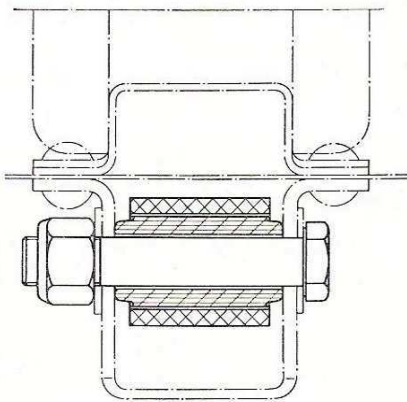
Semielliptic spring front end mounting. - Section through the bushing.
